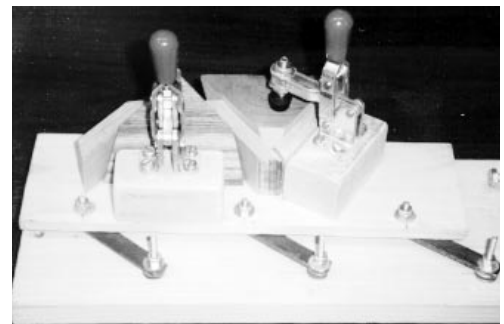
Finished Sanding Jig With Clock Pieces Clamped in Place.
